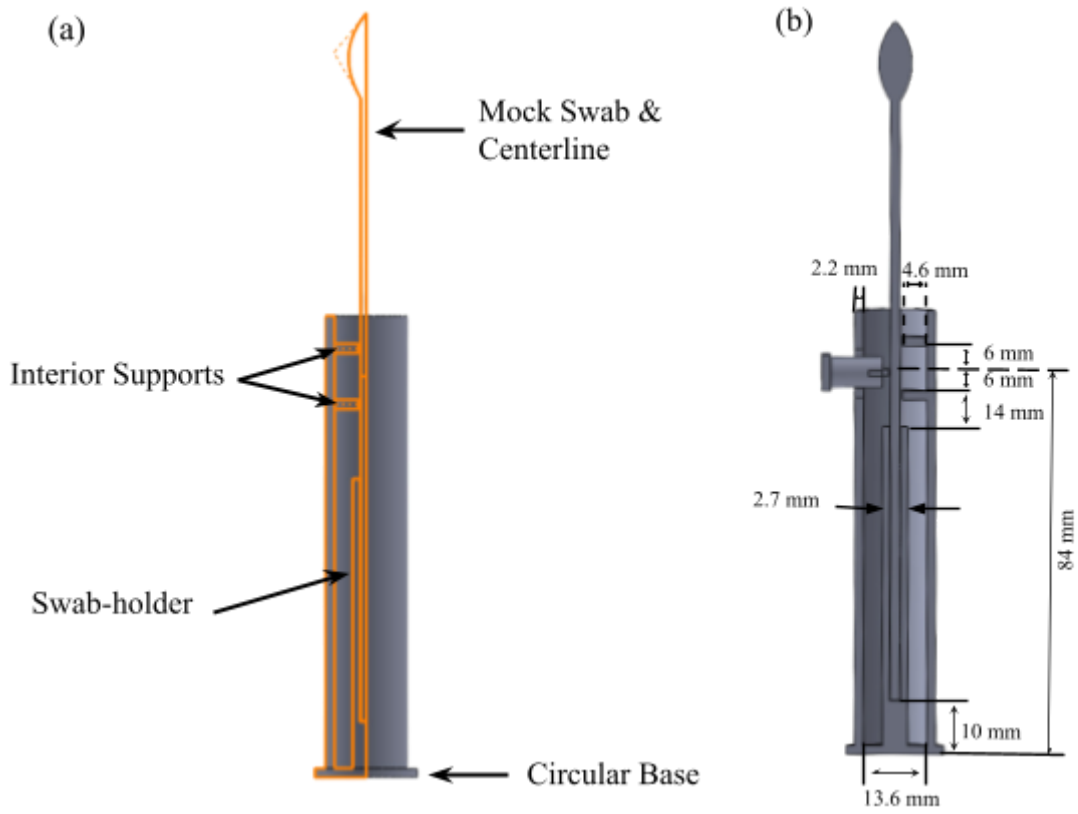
(a) Illustrative image of the CAD drawing utilized to fabricate the external casing with the two interior supports, swab-holder, and circular base indicated. (b) Dimensioned drawing of external casing section view.
